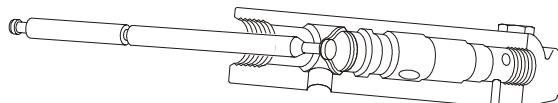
Insert bumper hook through center of bumper and pull straight out.
